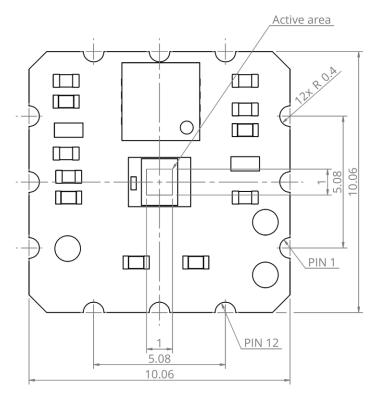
Dimensions of the AM03100-02 detectin module (given in mm)
